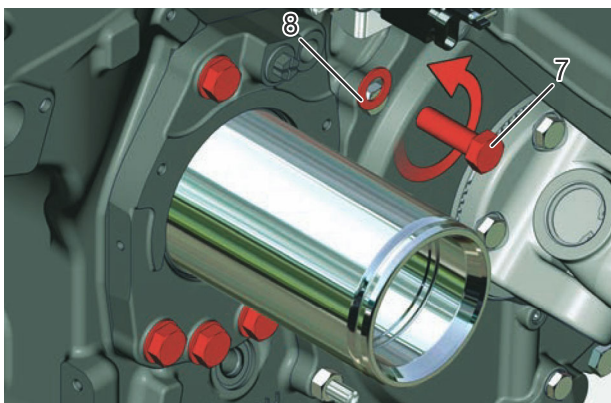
Remove the retainer screws (7) for the guide sleeve (9).
